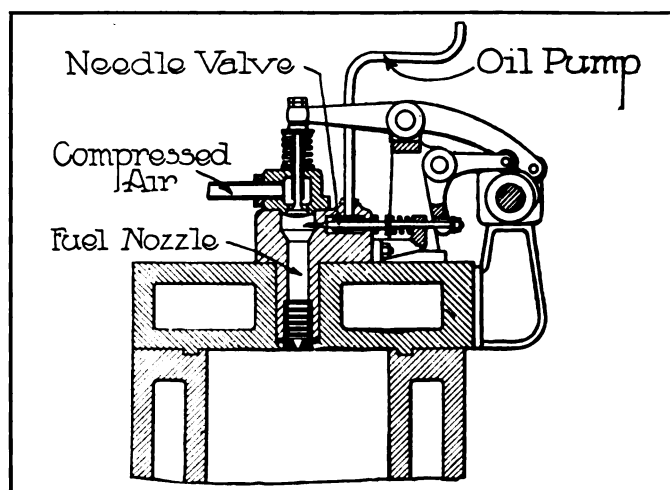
Suggested Method of Fuel Feed for Diesel Engines Which Might Be Adapted to Automobiles.
